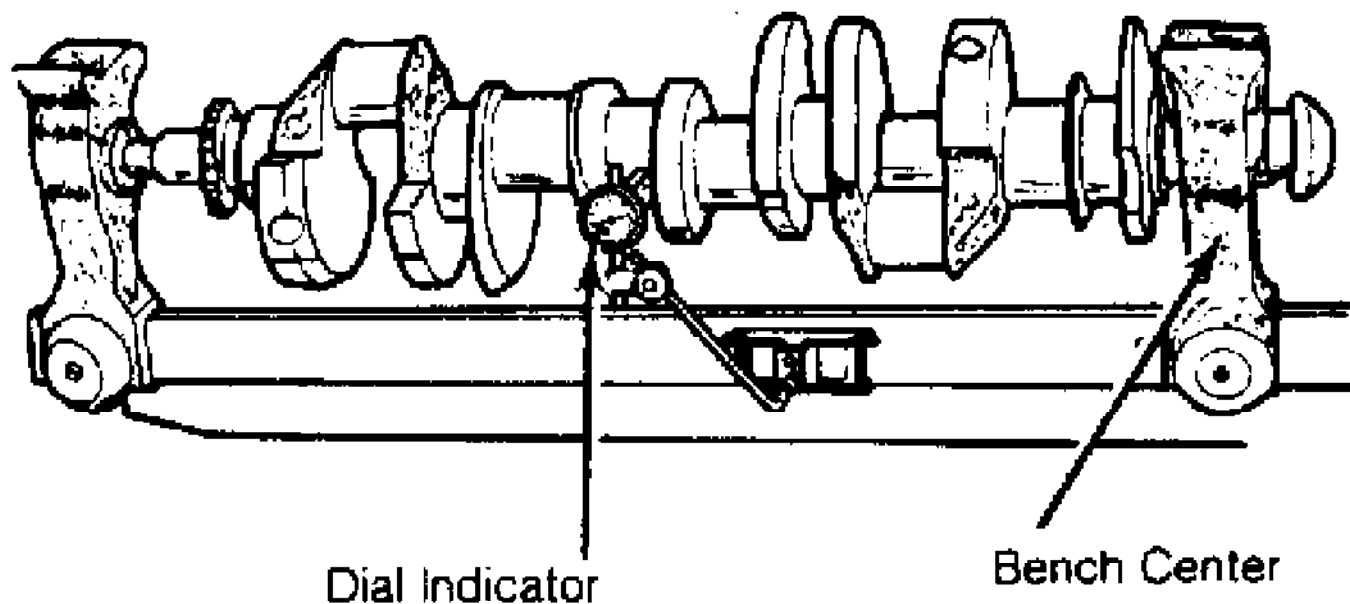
Measuring Crankshaft Main Bearing Journal Runout - Typical
